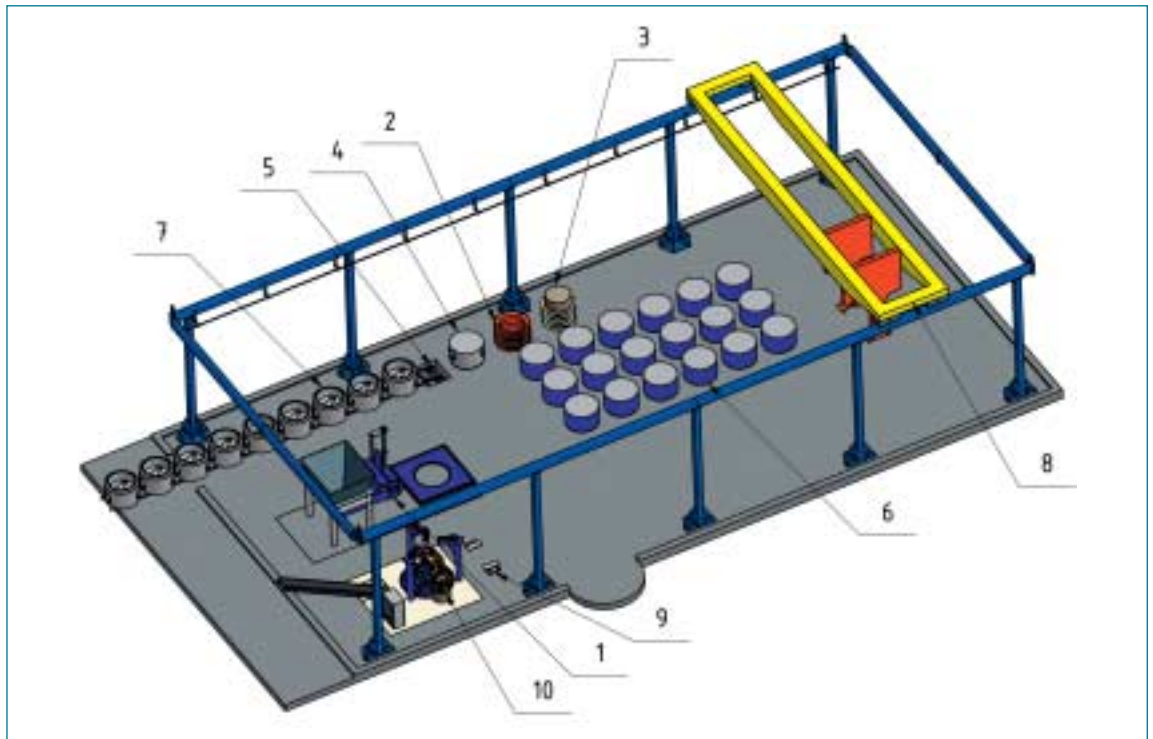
Outline of a complete Primus system including manufacturing (1), bottom pallets (2), internal support cores (3), bottom pallet removal (4), buffer line (5), molds (6), Primus base sections (7), crane turning gripper (8), internal support core removal (9) and milling gripper (10).
